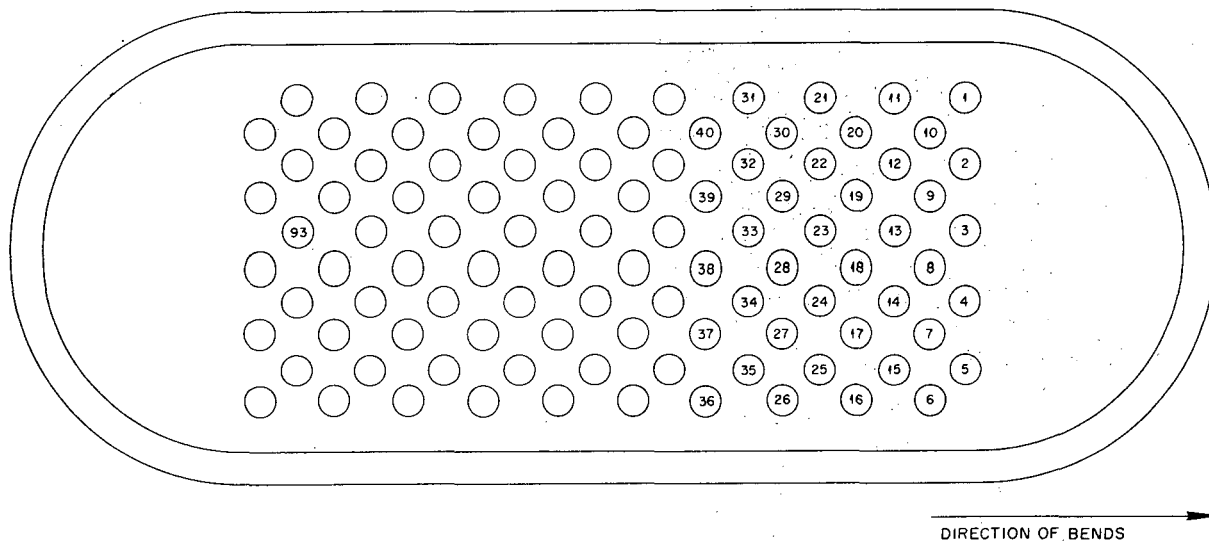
Tube-Sheet Configuration and Dissection Nomenclature. IHE No. 3 failure.
